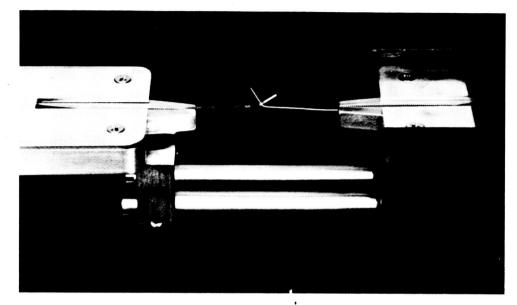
Weld joint being tested for ultimate strength in tensile tester (R105347).
